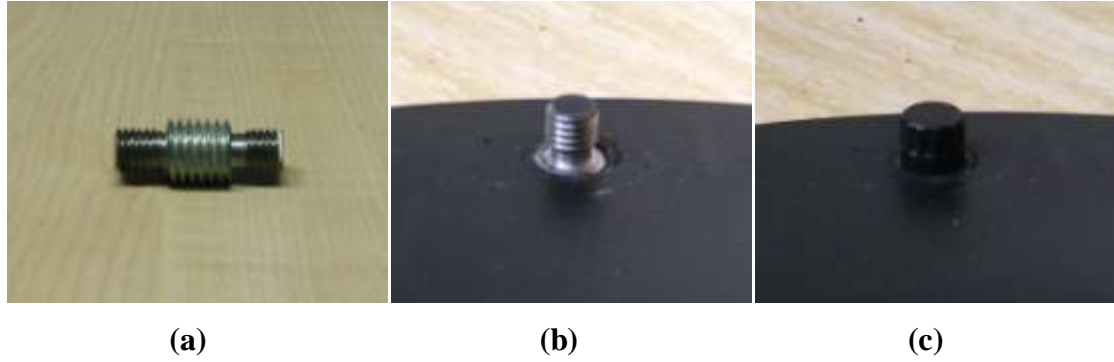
(a) Picture of disc insert for bi-hexagonal bolts. (b) Insert in the disc. (c) Bi-hexagonal bolt attached.
